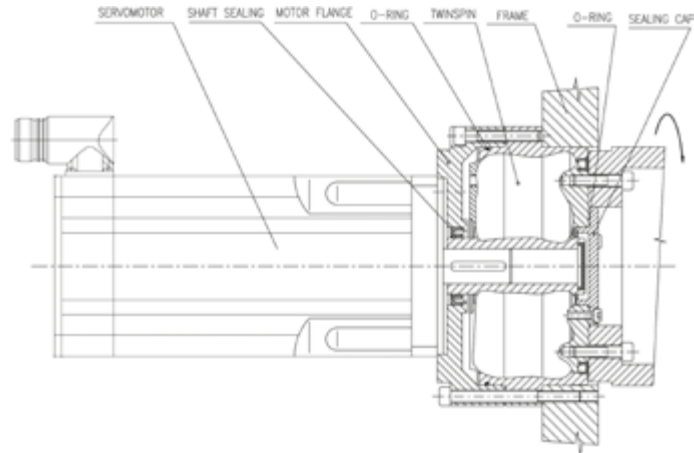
Direct connection of the reduction gear shaft with the motor shaft
